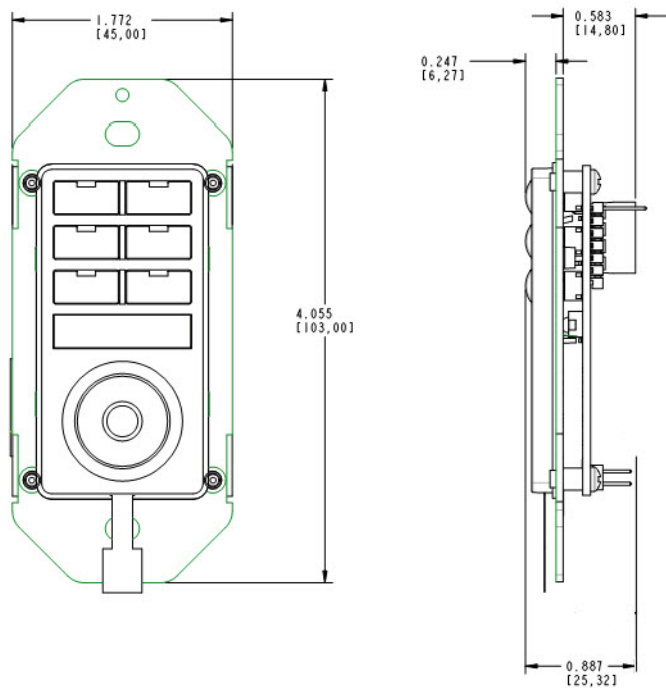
Mounting Dimensions - DAS-MET-6SRC
